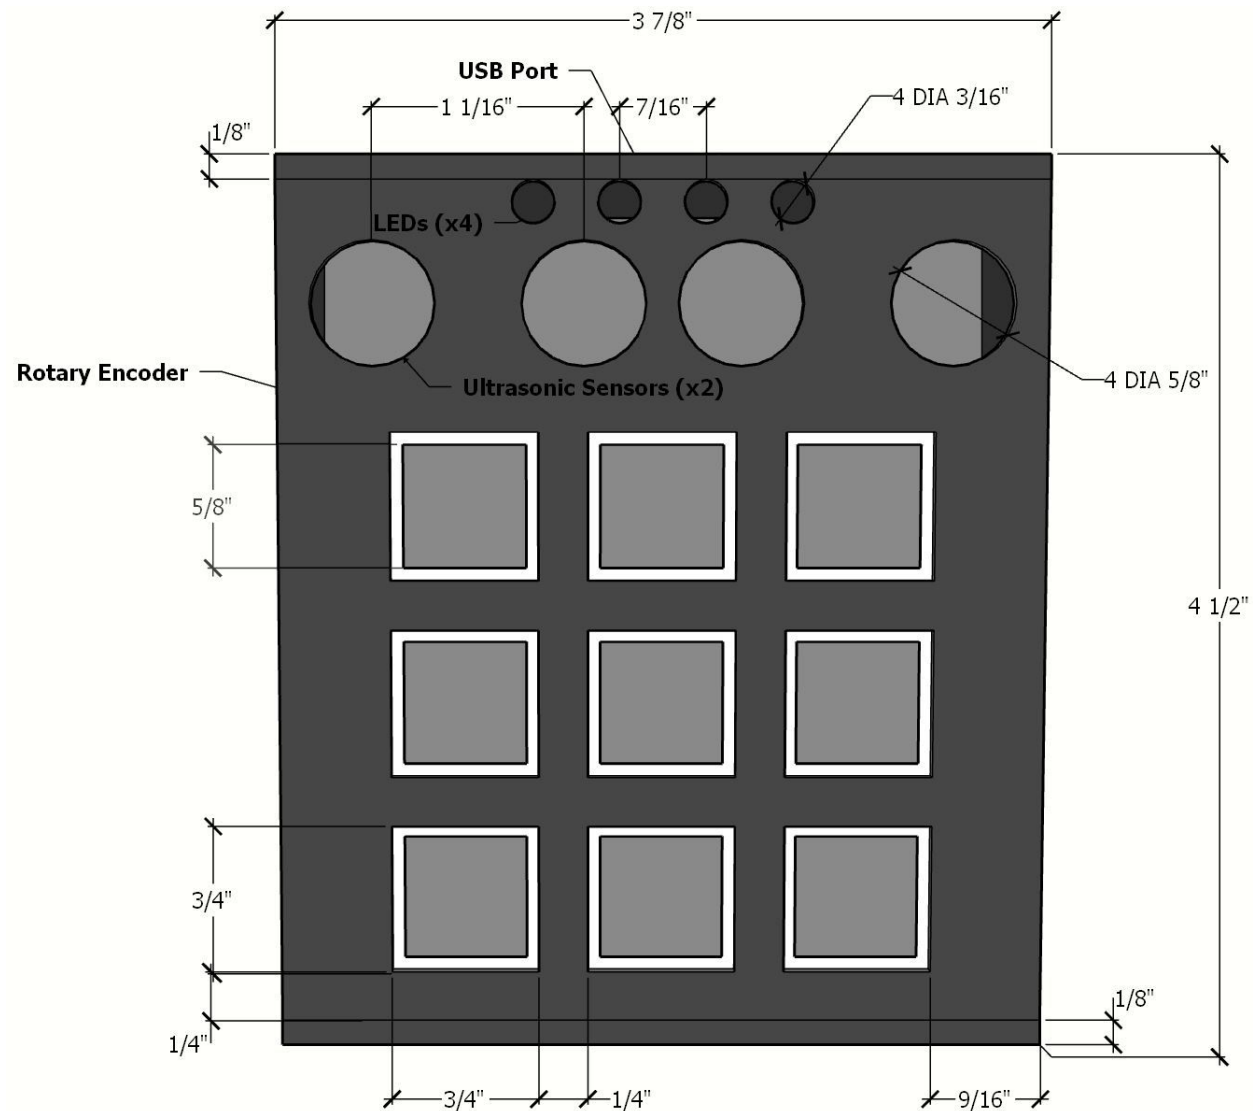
Top view of the PC Buttonpad outer shell with dimensions.
